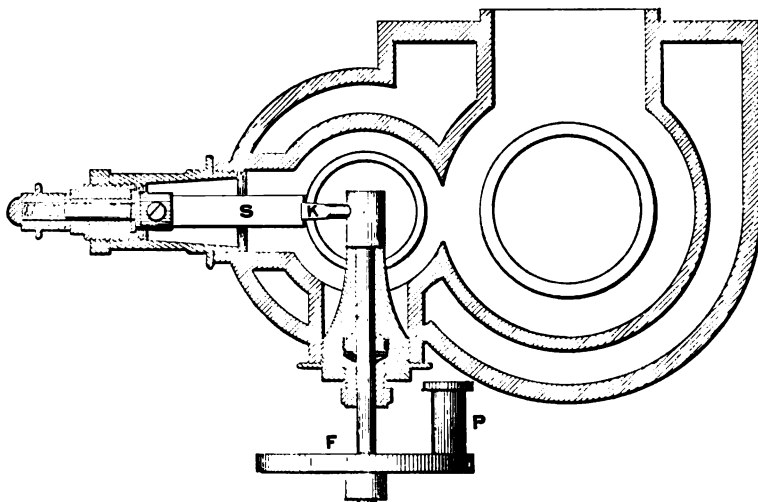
VERTICAL SECTION THROUGH VALVE CHAMBERS OF UNION ENGINE.
